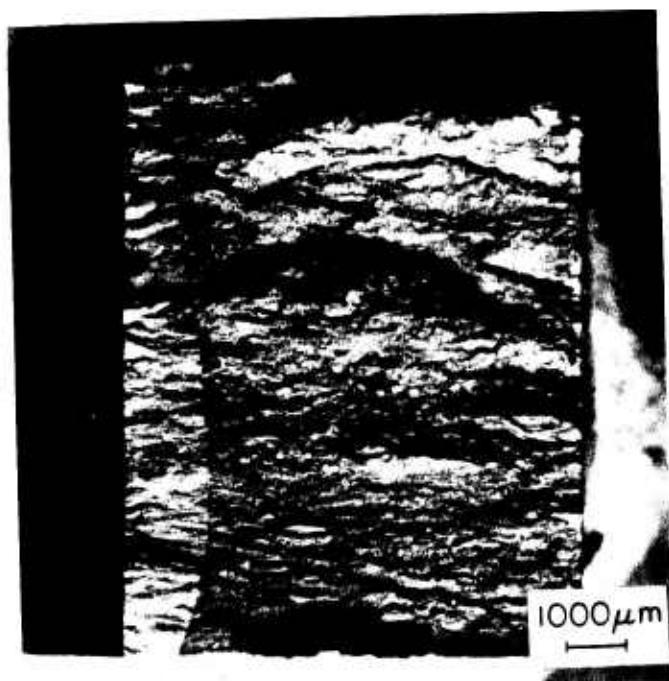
Alloy 227, sample 7SLC1. Fracture surface X8.
